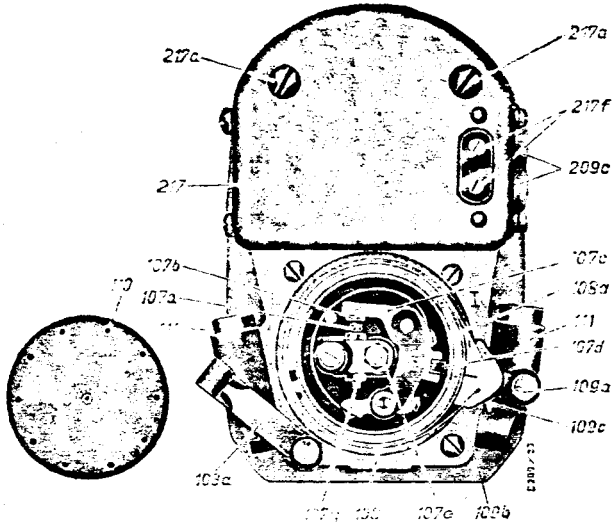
Dynamo-Magneto D 2 B, with contact breaker cover removed
